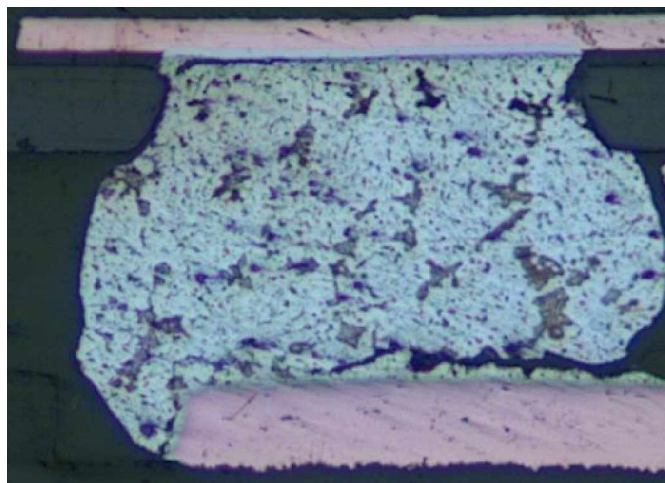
63Sn37Pb Solder Interconnect Failure at the solder-to-board interface in 8mm, 132 I/O BGA.
